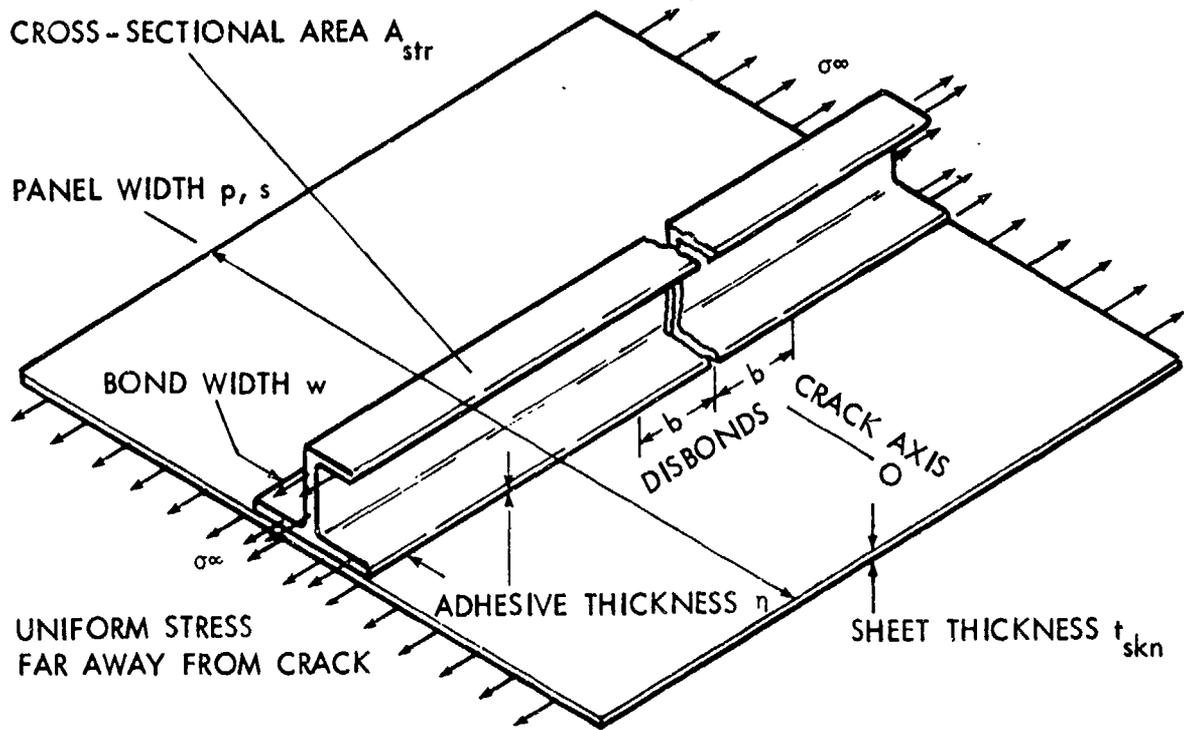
SHEET BONDED TO CRACKED STIFFENER
